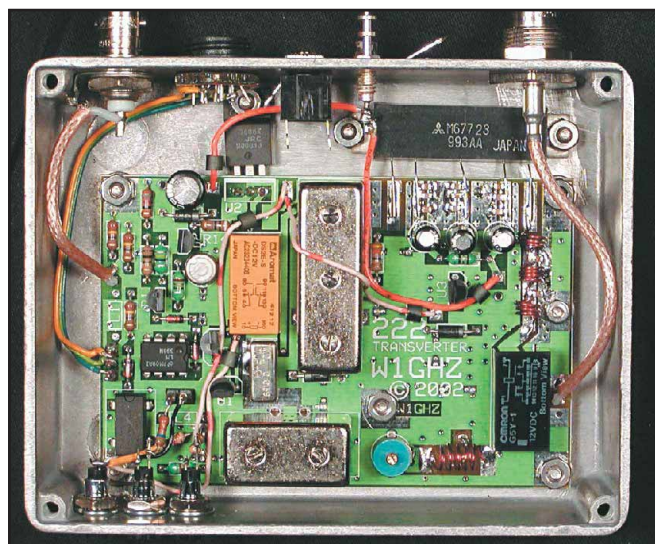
The transverter enclosure with the cover open, showing the completed assembly.
